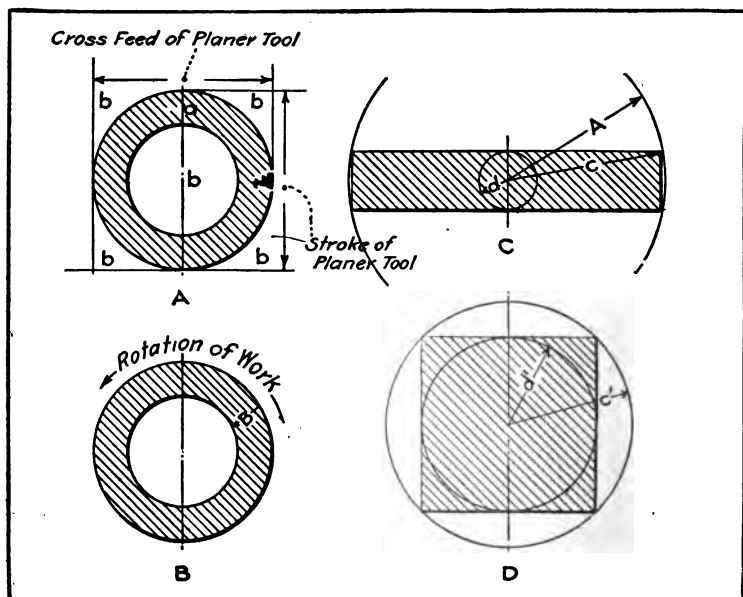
EFFECTIVE CUTTING AREAS ON THE PLANER AND BORING MILL
